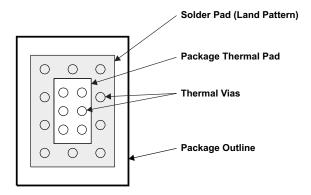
Package and PCB Land Configuration for a Multilayer PCB
